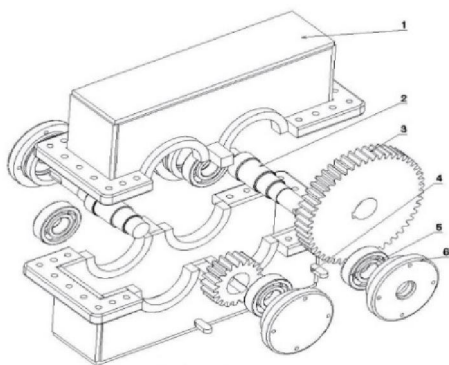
Schematics view of the gearbox: 1-Gearbox Case, 2-Shaft, 3-Gear, 4-Key, 5-Ball bearing, 6-Ball bearing housing
